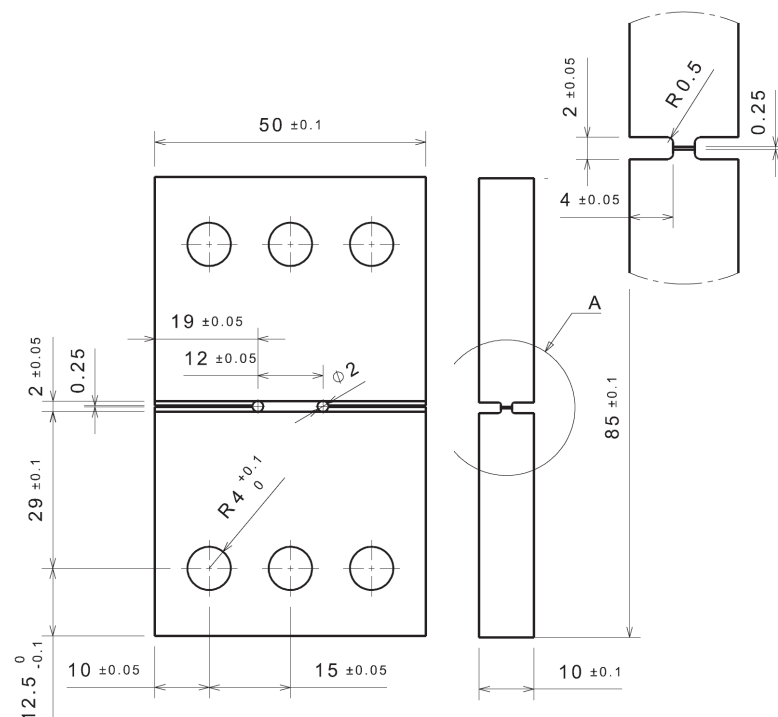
The dimensions of *CTS notch* specimen. The height of the damage zone is 2 mm with a thickness of 2 mm.
